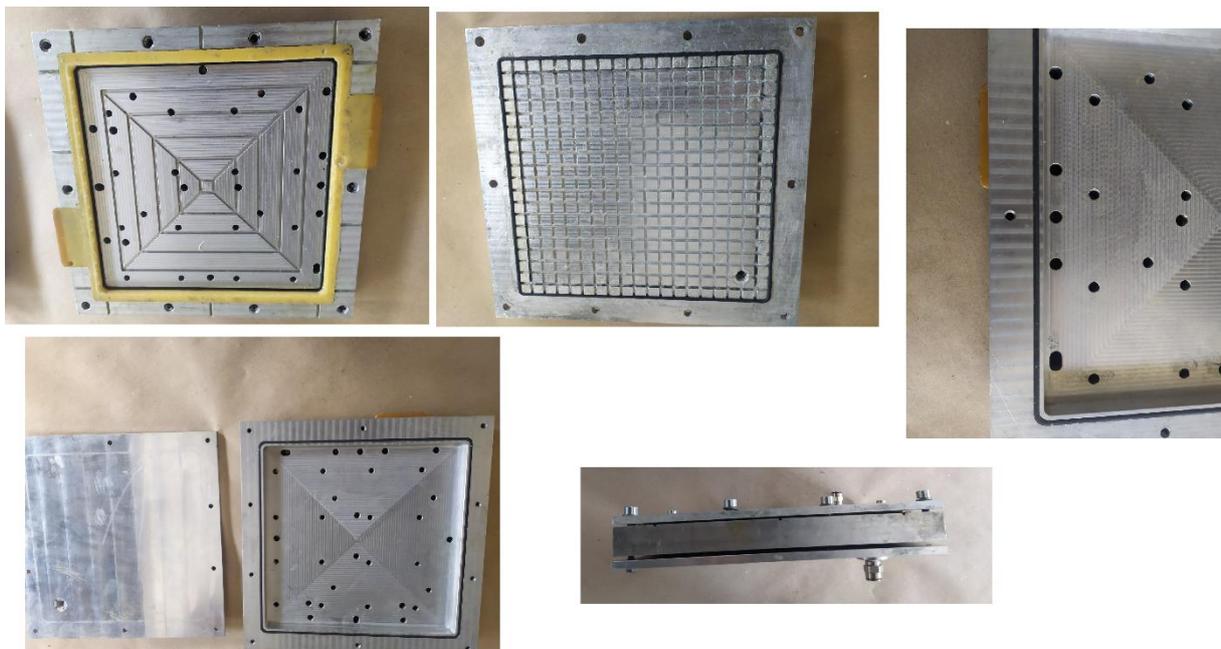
Fittings № 2 for plate forming, consisting of 3 parts
